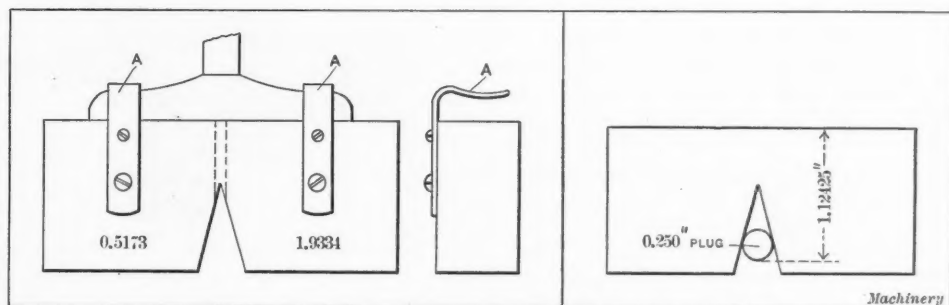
Gage for measuring the Flat on Acme Thread Tool
